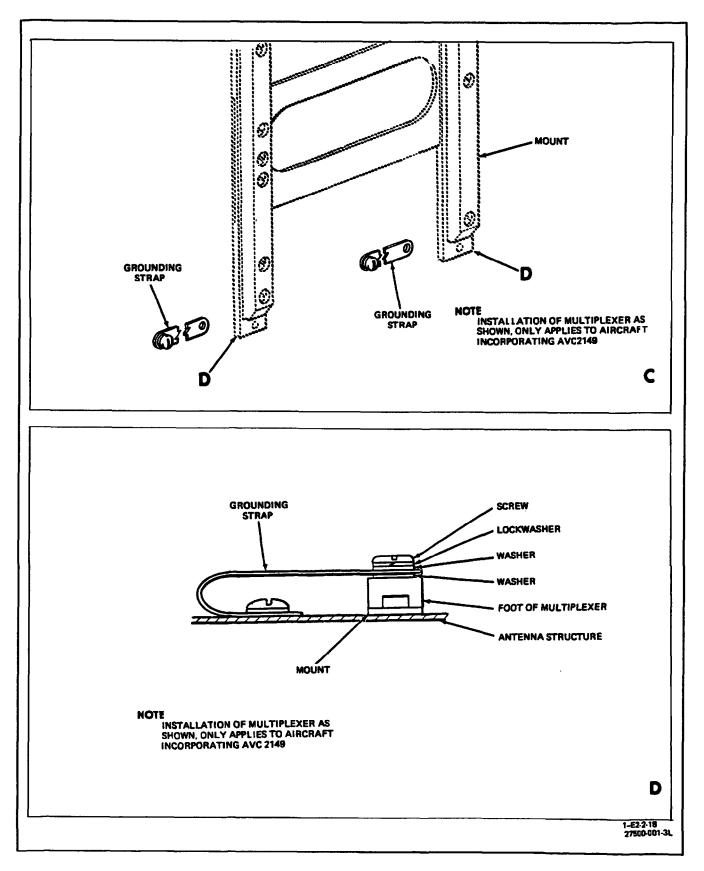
Removal and Installation of Multiplexer TD-1203/APS-125 (Sheet 3)
